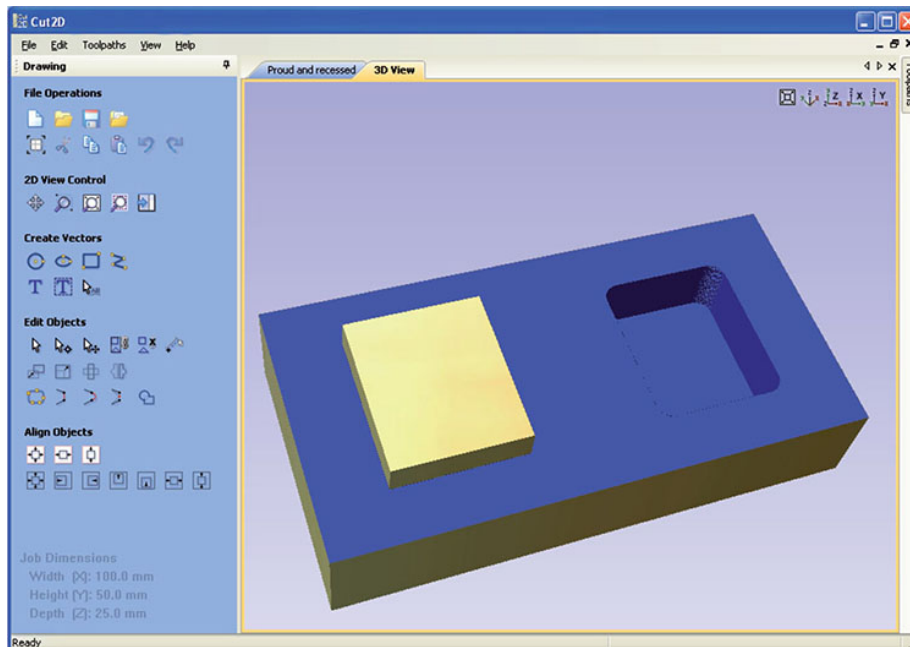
Preview of the toolpath for a workpiece with a protruding profile and a recessed pocket.
